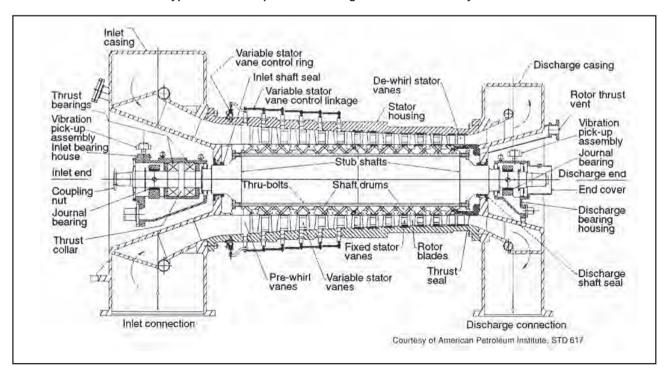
Typical Axial Compressor Showing Nomenclature of Key Parts
